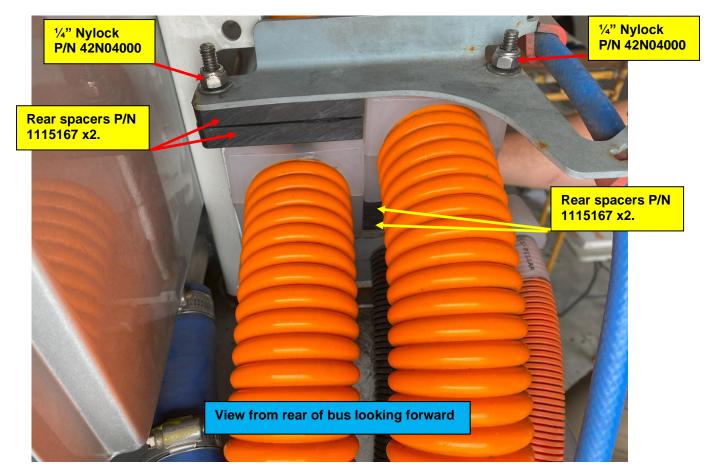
Zone B view from rear looking forward - Reassemble clamp bundle with spacers
